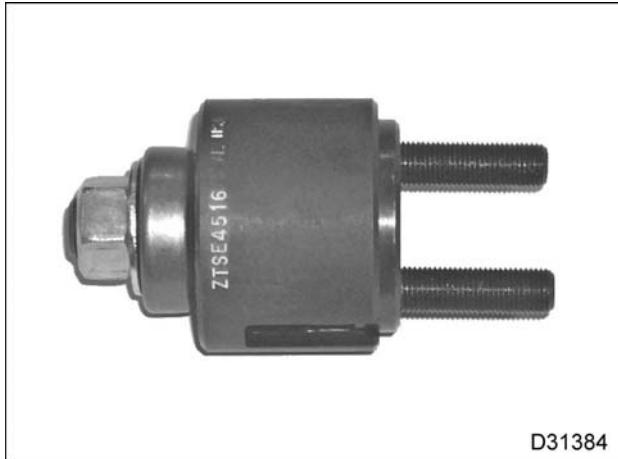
Front Seal Installer / Wear Sleeve Installer ZTSE4516
